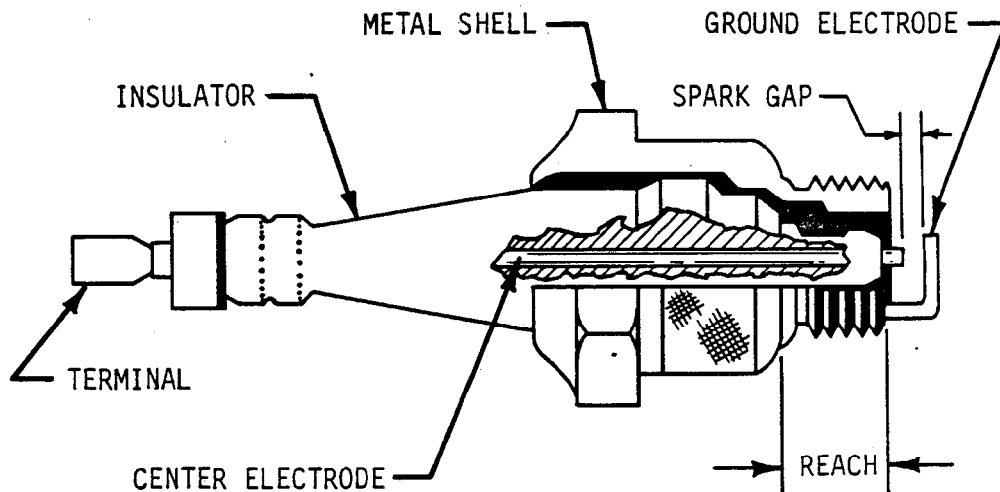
CONSTRUCTION DETAILS - TYPICAL SPARK PLUG
